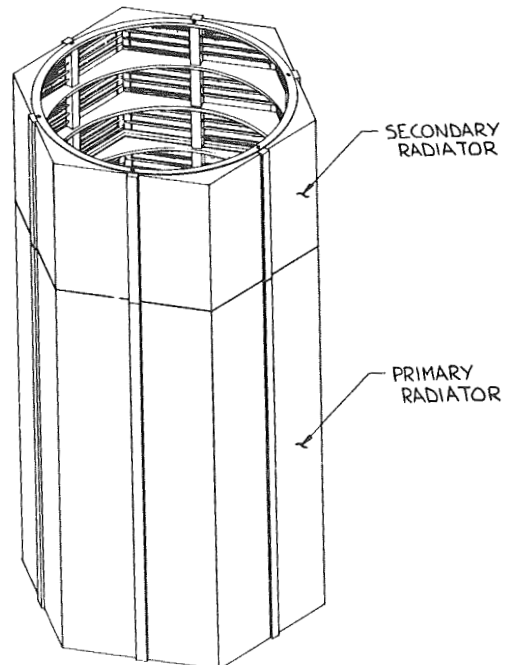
Vapor Chamber Fin Radiator Assembly Sequence Step 8
